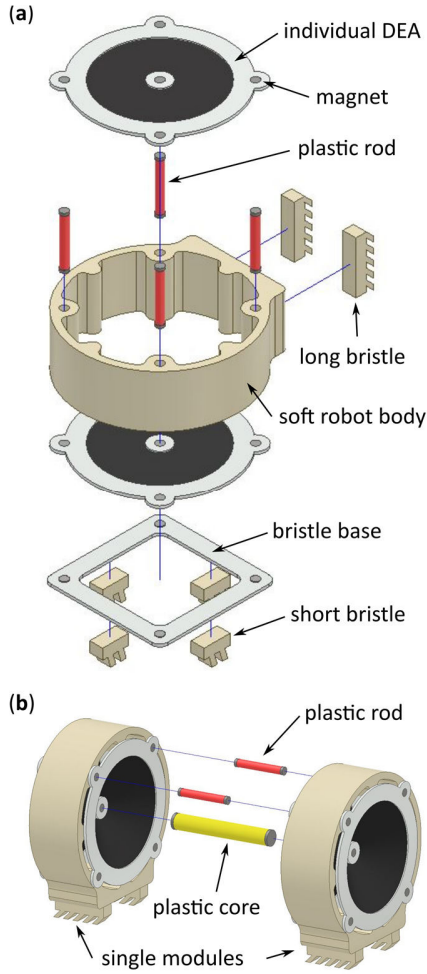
(a) Exposed view of one robot module. (b) Two modules assembled.
